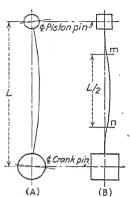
Connectingrod deflection (exaggerated). (A) In the plane of rotation, (B) in the plane of the piston and crankpin axes.
